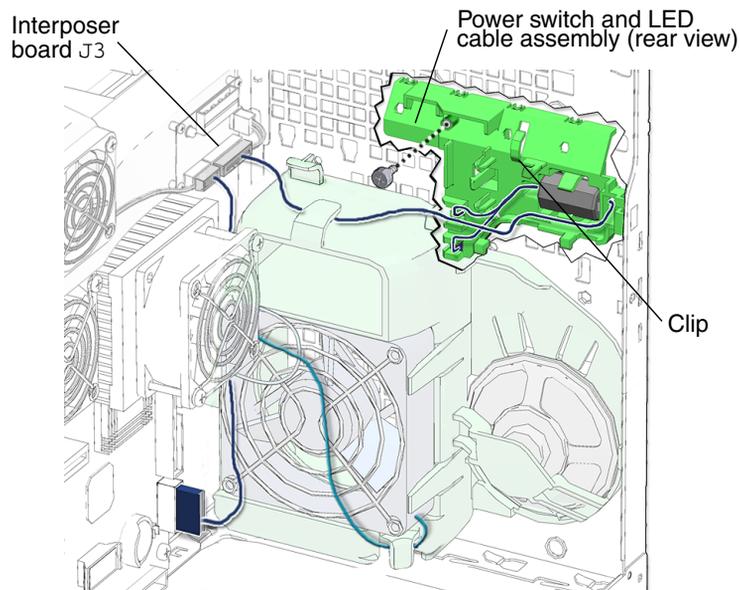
Connecting the Power Switch and LED Cable Assembly
